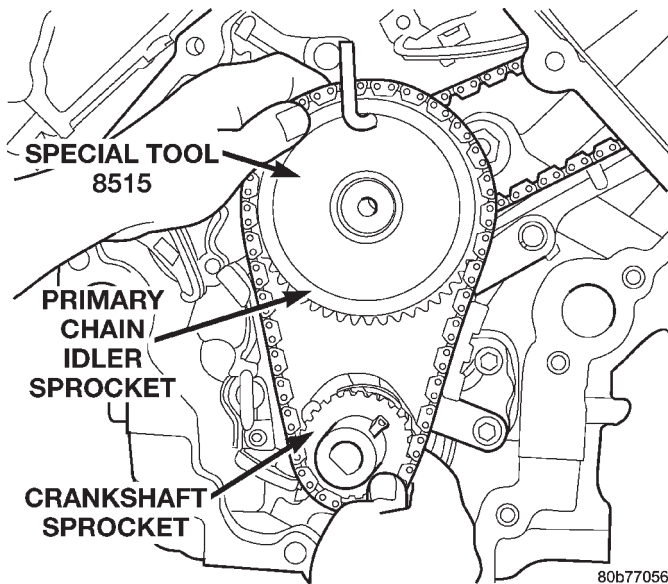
Installing Idler Gear, Primary and Secondary Timing Chains
